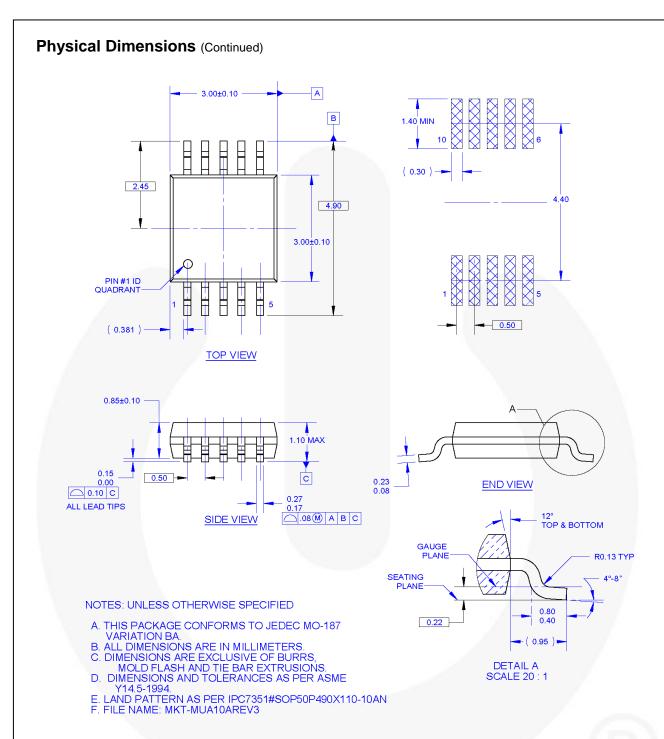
10-Lead, Molded Small Outline Package (MSOP)
